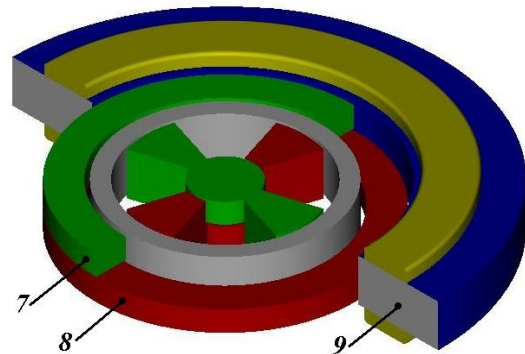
Structure of the unit of the free-swinging piston engine and oscillating rotary electrical machine.
